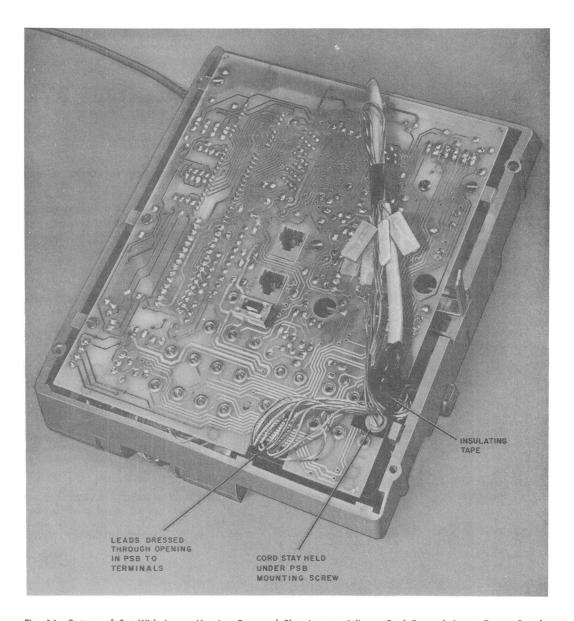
Bottom of Set With Lower Housing Removed Showing an Adjunct Cord Dressed Across Power Supply Board (PSB)
